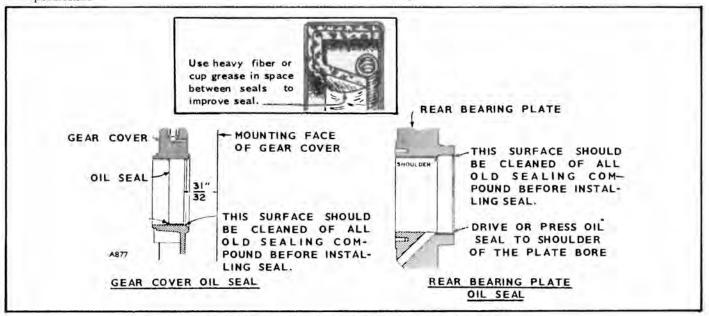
GEAR COVER AND REAR BEARING PLATE OIL SEALS
